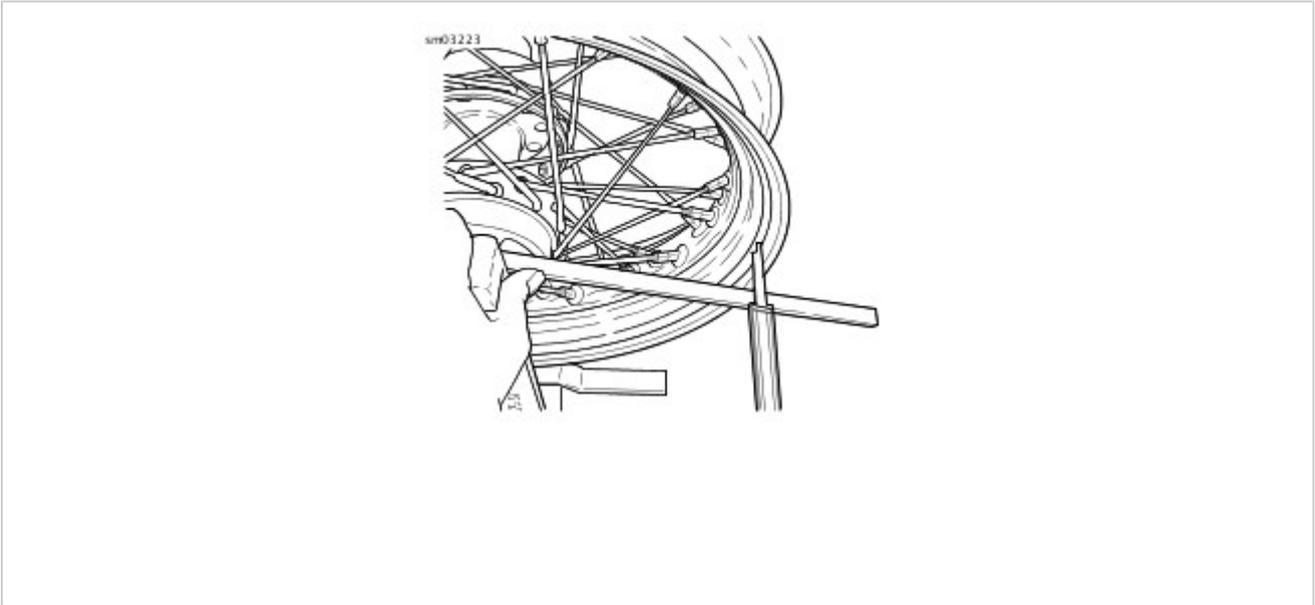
Checking Wheel Hub Offset Dimension (Typical)
